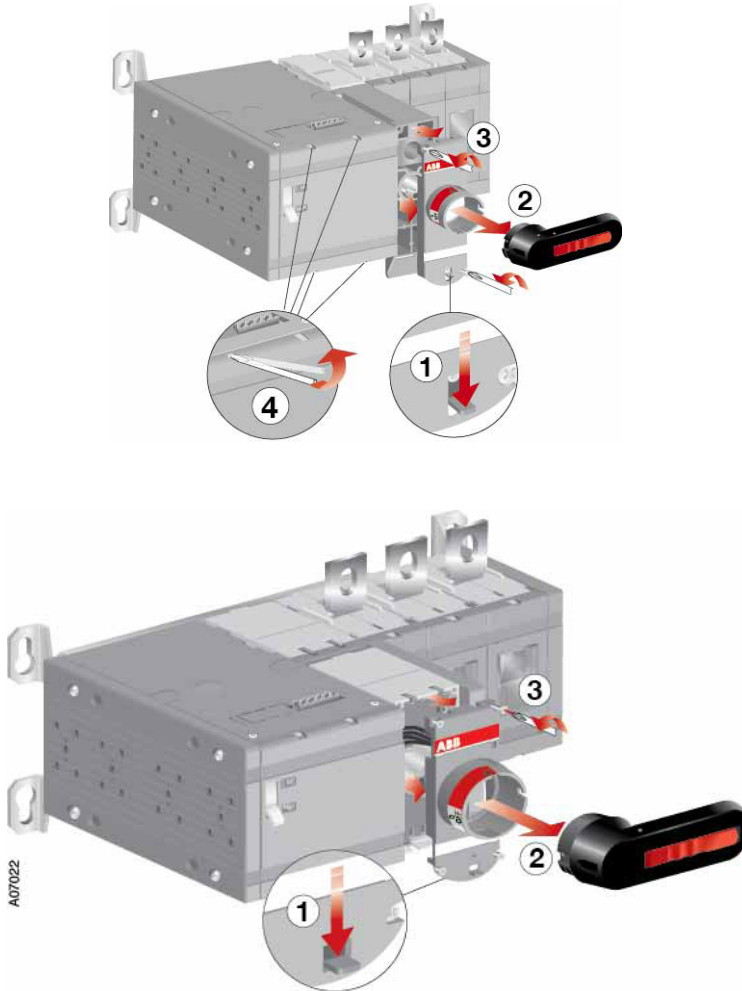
Optional extra; Test auxiliary contacts can be mounted on the switch mechanism, first remove the mechanism cover as shown in the figure
